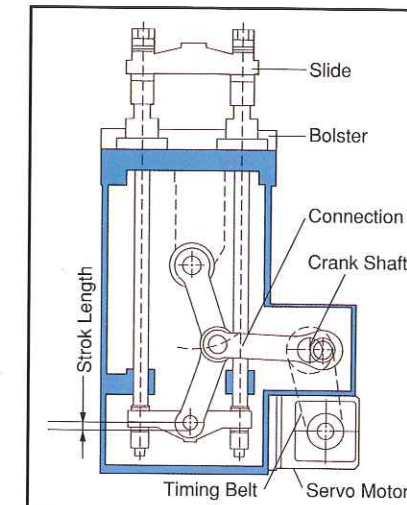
Basic structure of Crank shaft indirect drive system (toggle crank system)
